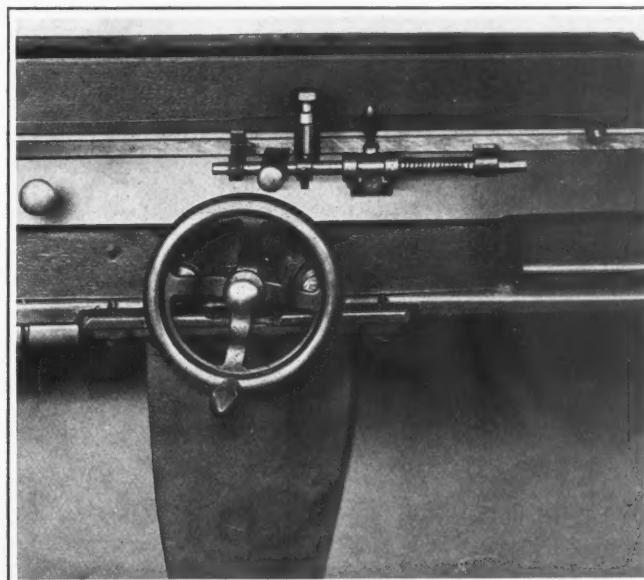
Close View at Center of Bed, showing Feed Reversing Mechanism and Wheel for Rapid Hand Traverse
